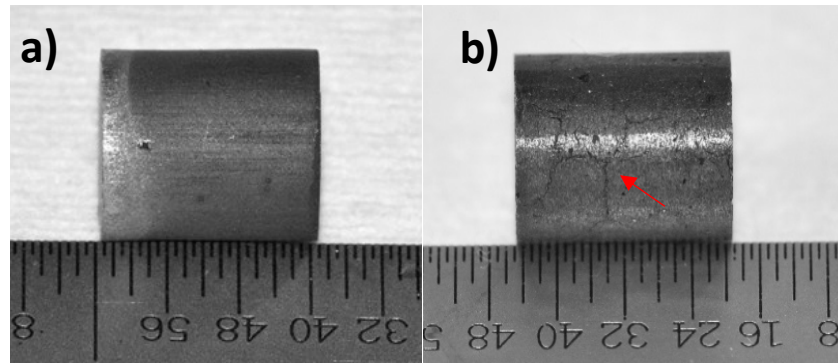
a) sintered pellet prior to centerless grinding, no visible surface cracks; b) pellet after centerless grinding, visible surface cracks. Pellets were sintered in vacuum at 1500°C for 5 hours. Scale bar in inches.
